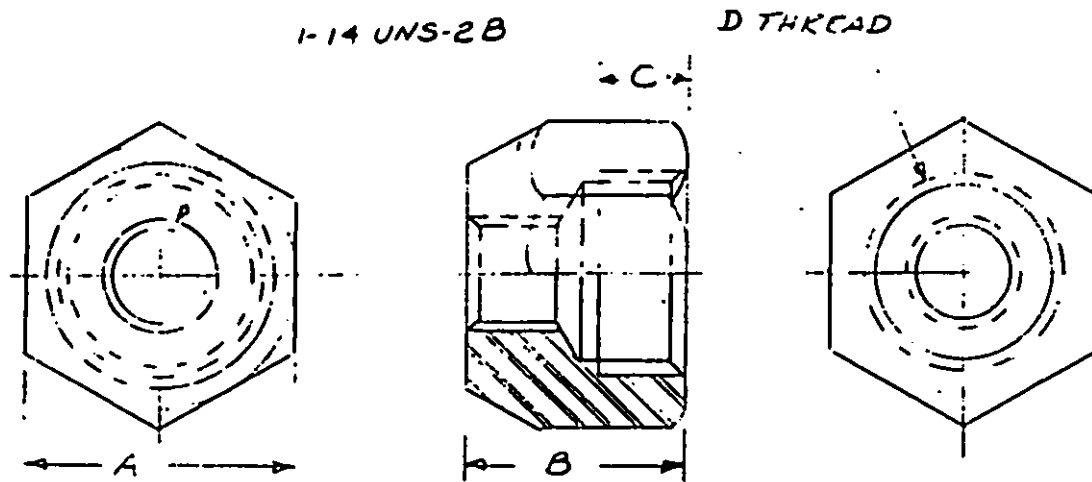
Type XIII, class 2, style B, puller adapter, mechanical, gear and bearing, female thread with 1-14 UNS-2B tapped hole.
